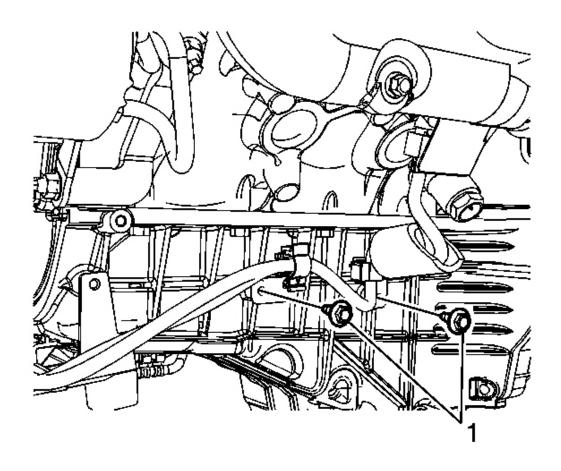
Engine Wire Harness Bracket Bolts Courtesy of GENERAL MOTORS CORP.
